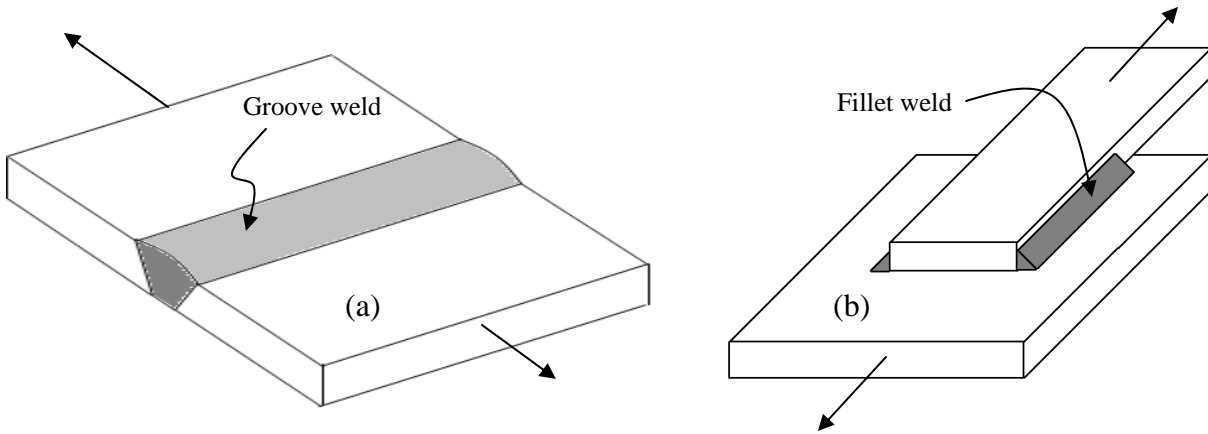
Weld joints (a) Butt and (b) Lapped
